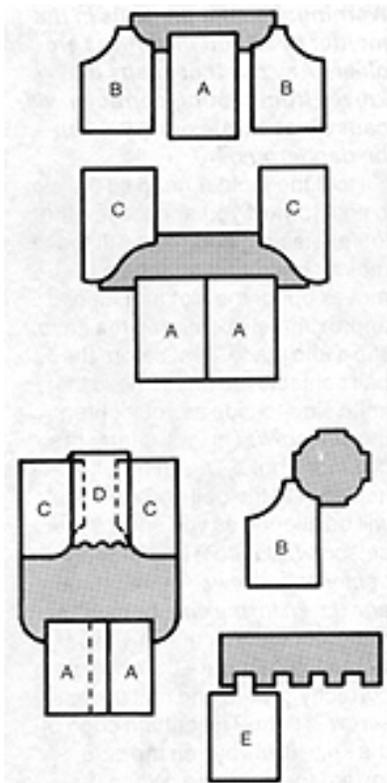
These shapes are typical of advanced work you can do with the molder head accessory. The shapes of different knives combine to produce the final form. Work like this should be planned in advance, on paper, using the knives as templates: (A) 1" jointer; (B) combination 1/2" and 1/4" quarter-round; (C) ogee; (D) three-bead; (E) groove (part of the tongue-and-groove set).
